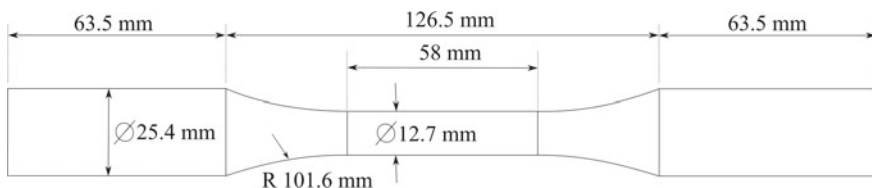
Solid AISI 1144 rods used for multiaxial testing. Dimensions are in mm [33]
